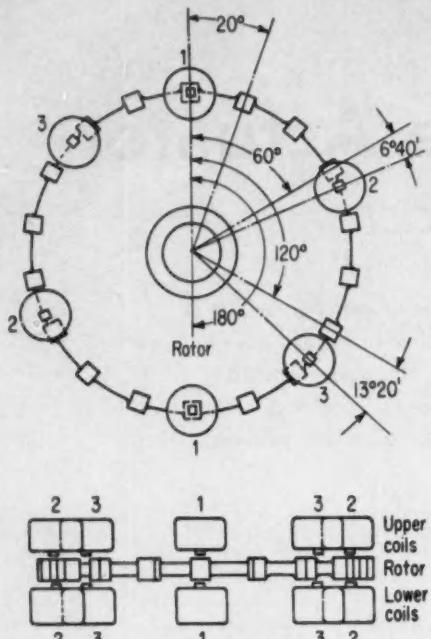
Coil-rotor relationship for a single position of the rotor.
